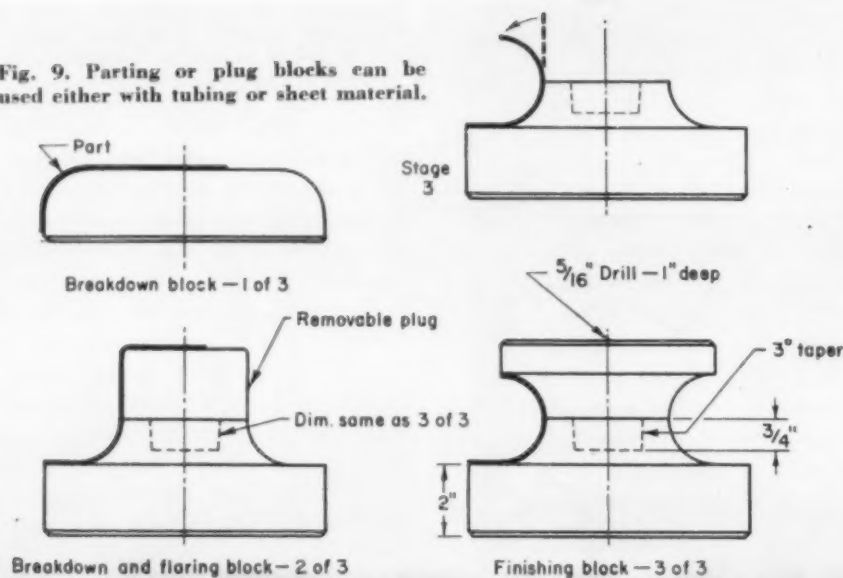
Parting or plug blocks can be used either with tubing or sheet material.
